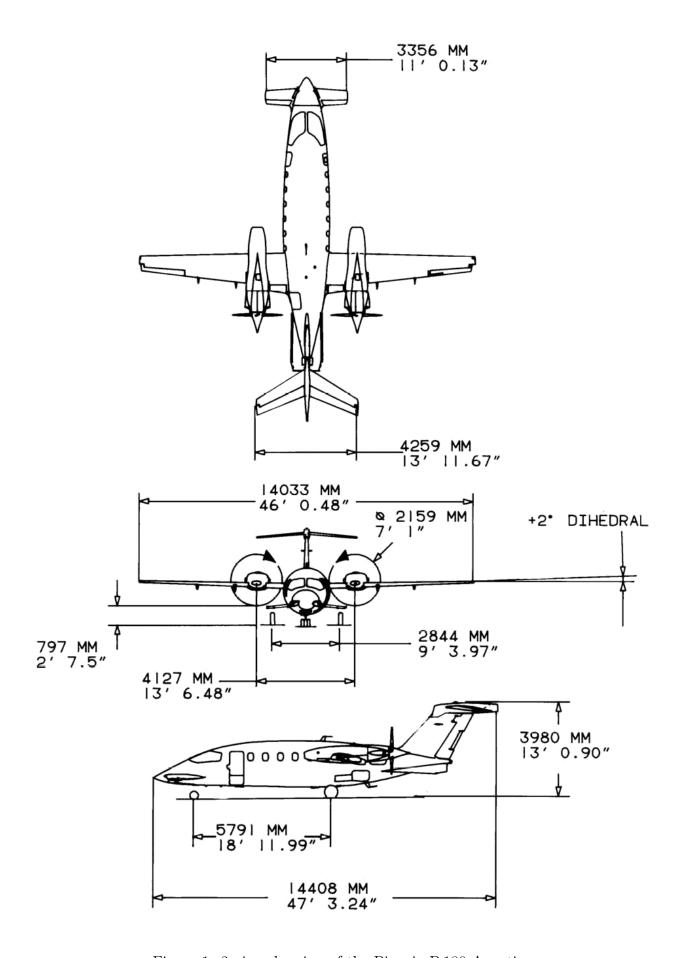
3-view drawing of the Piaggio P.180 Avanti
